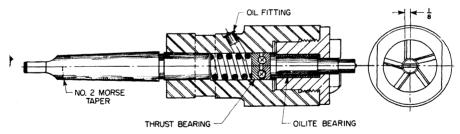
Special tool with center holddown for spot-facing die castings.
